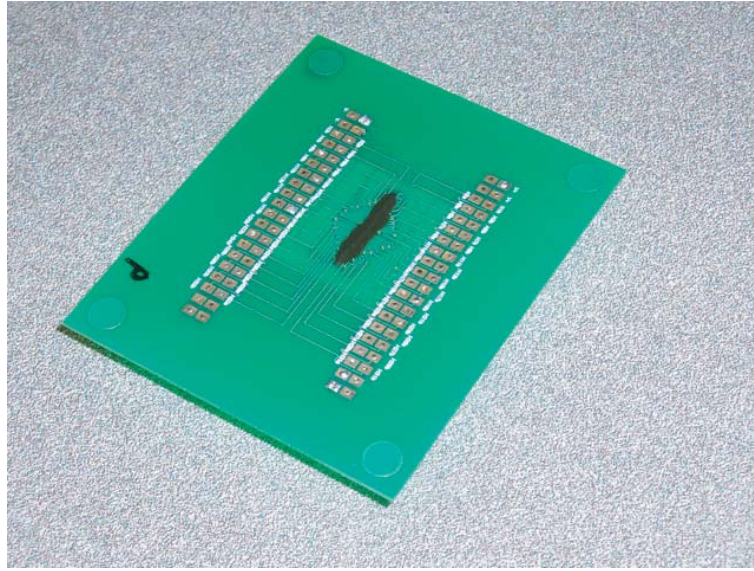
PCB showing the 32 element Hall array. This side would be resting on the specimen
